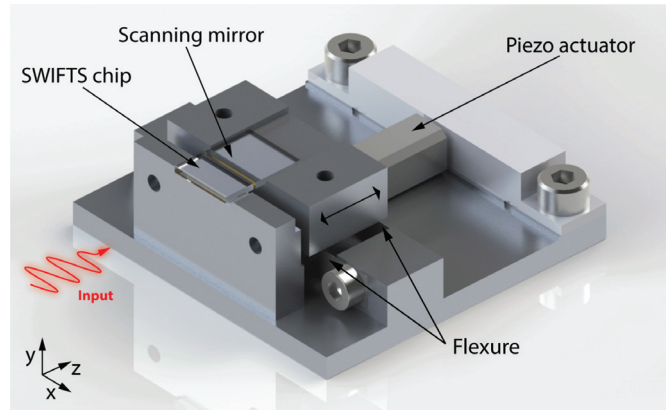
3D drawing of the chip holder including the scanning mirror driven by a piezo actuator.
